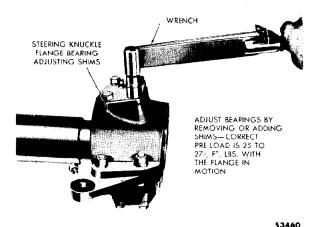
Adjusting Steering Knuckle Flange Bearing — Tool C-524
